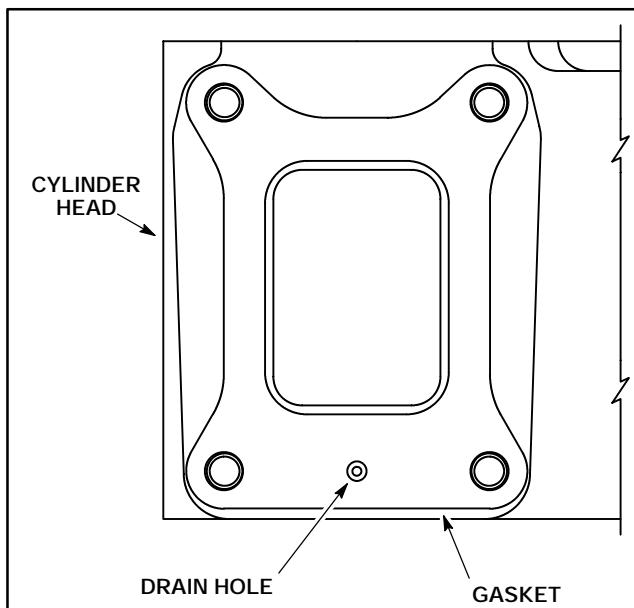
VGF Exhaust Manifold Drain Hole
